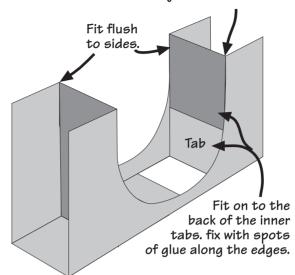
ARCHED INNER ROOF & WALL SECTION (SHEET 'B').
